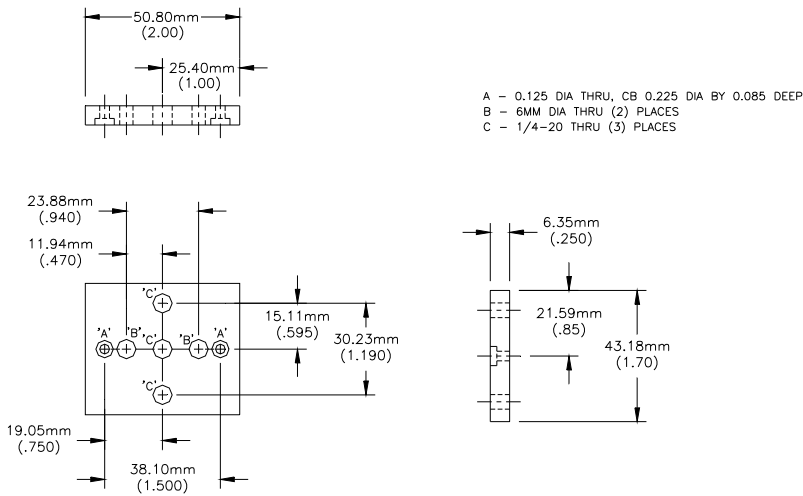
HEBMA-2 — Optional Mounting Block for HawkEye™ 1525
